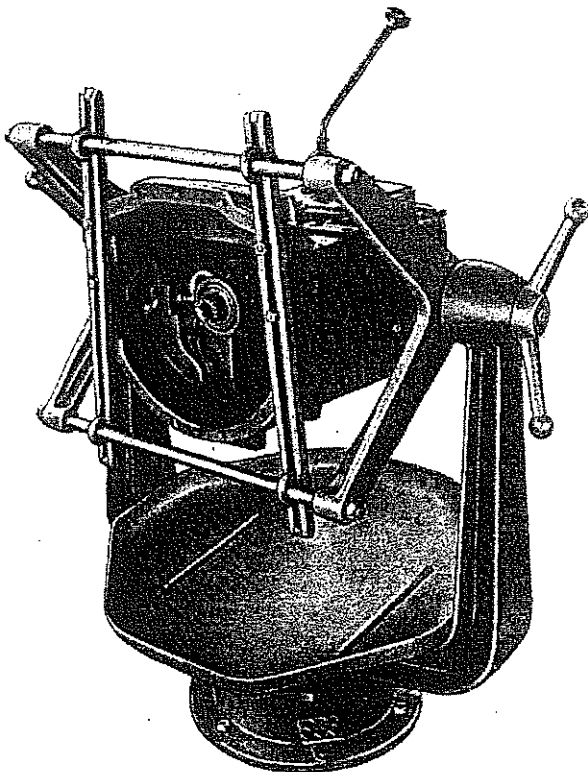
Gearbox casing mounted on rotary stand ARR 2204.
